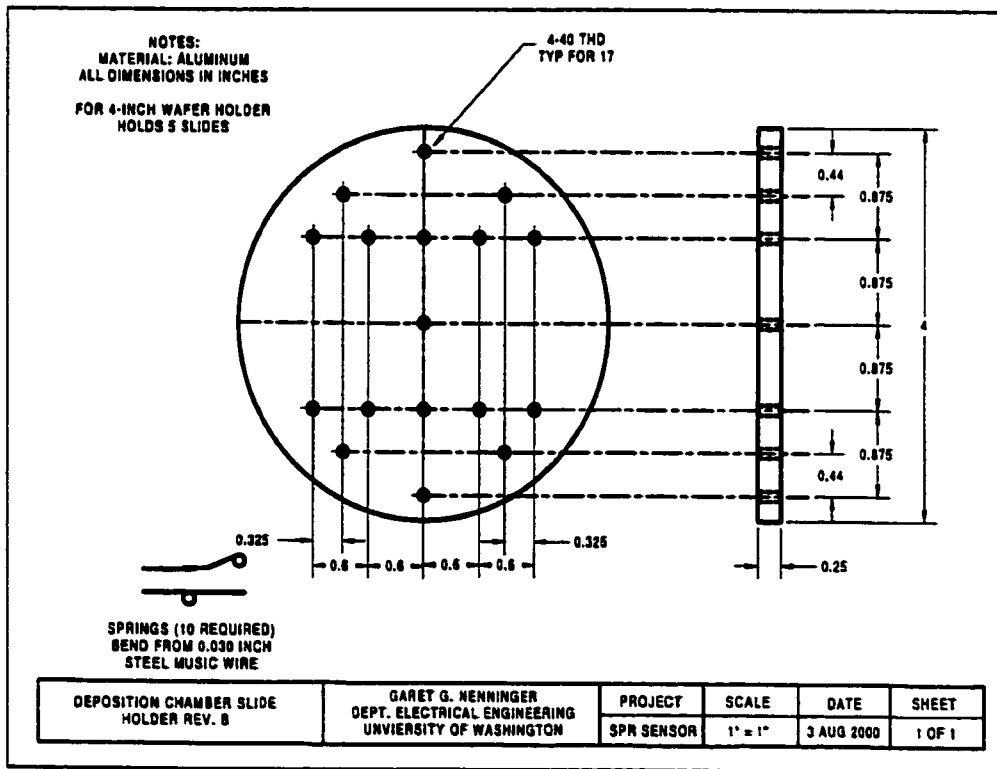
Deposition holder for holding five sensor substrates in a 4-inch wafer holder during vacuum deposition of the gold layer. Drawing size has been reduced from the original.
